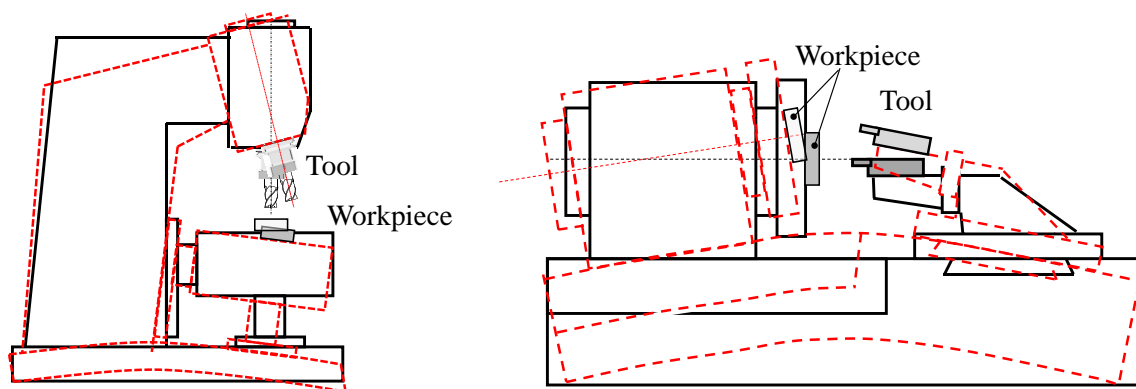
Change in cutting edge position in thermal deformation of machine tools.
